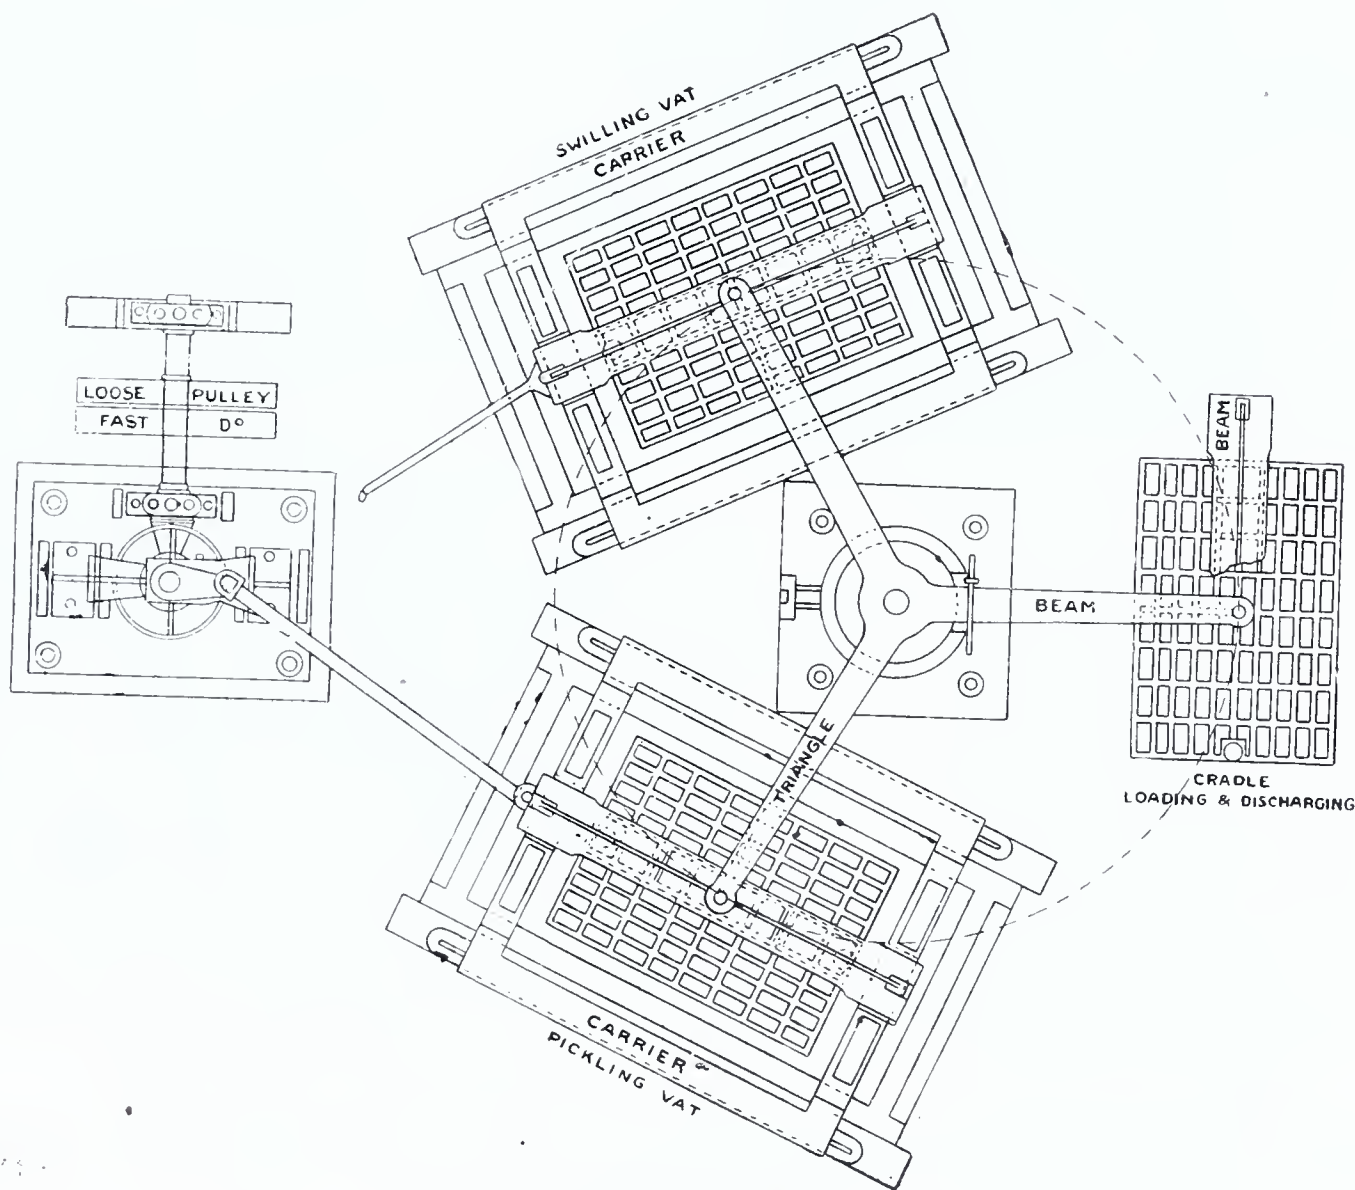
Hutchins Horizontal Pickling Machine. 1888 S.
